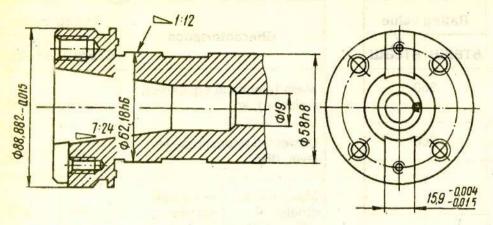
Swivel Head Spindle Nose Tooling and Fitting Dimensions
